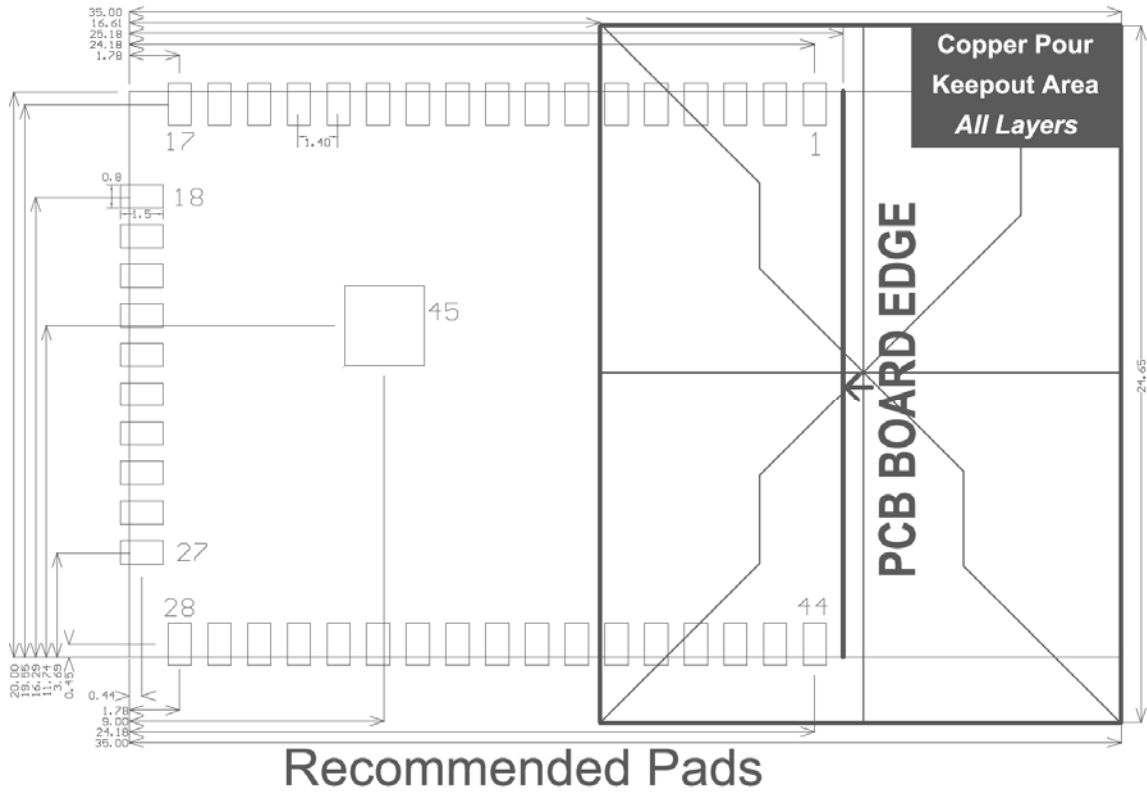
AES-BCM4343W-M1-G Module PCB Footprint
